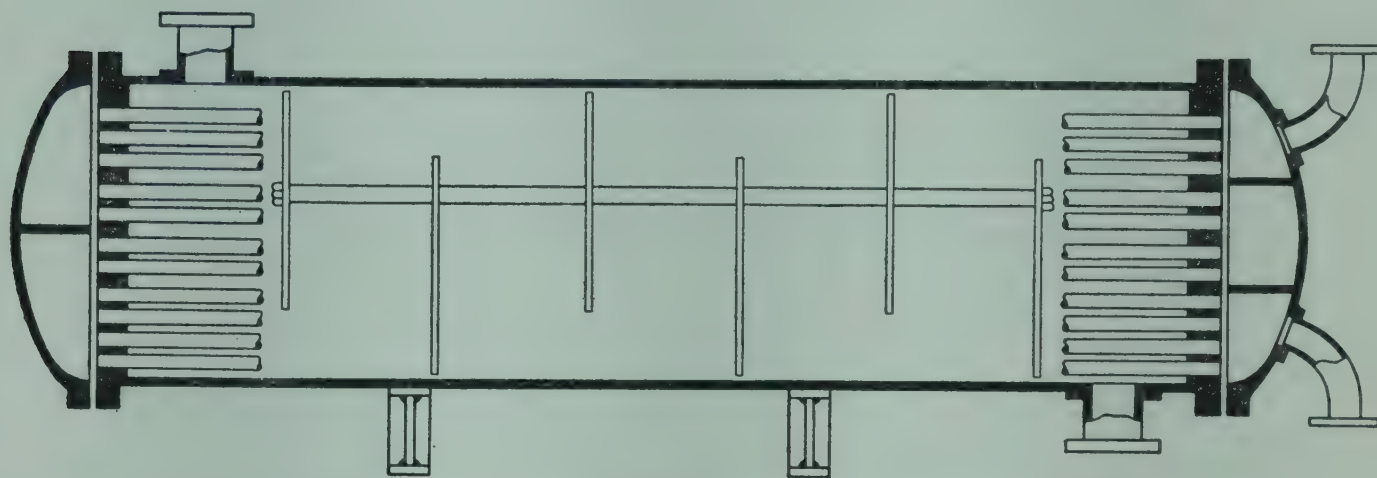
Heat exchanger with fixed tube plates (4 tube pass 1 shell pass)
